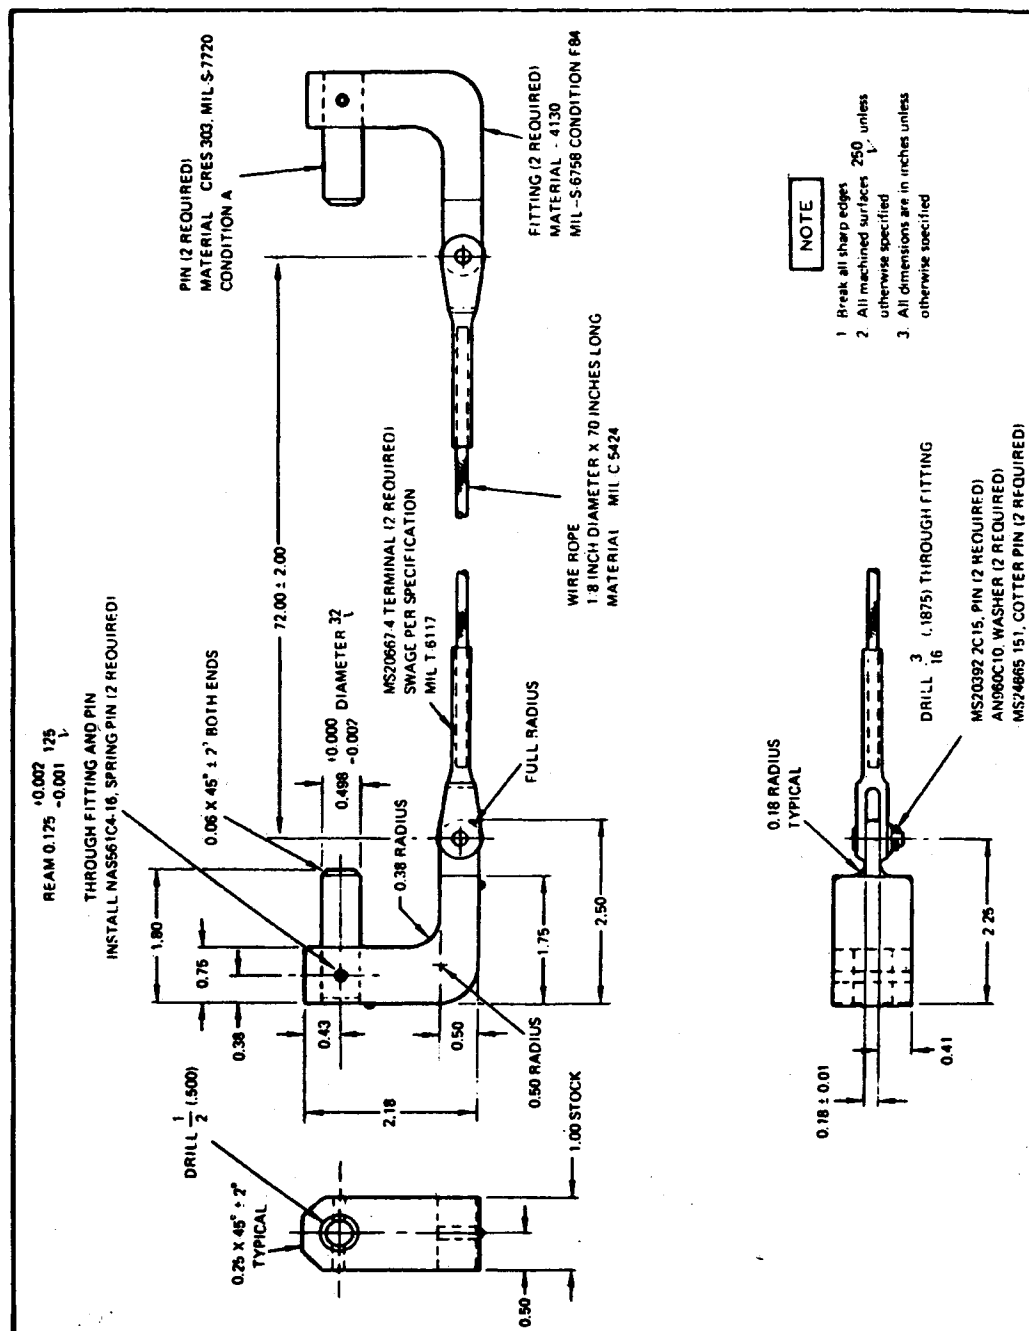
Arresting Gear Hook Support Assembly Fabrication
